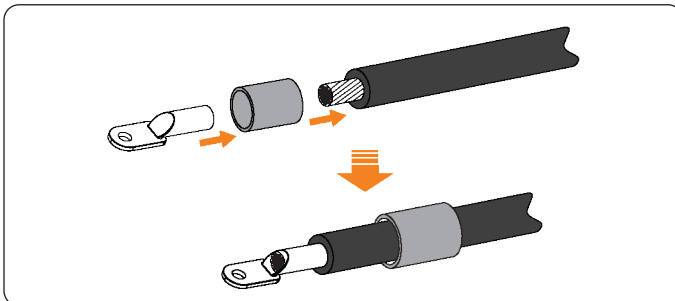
Assembling heat-shrink tubing, cable, and terminal
